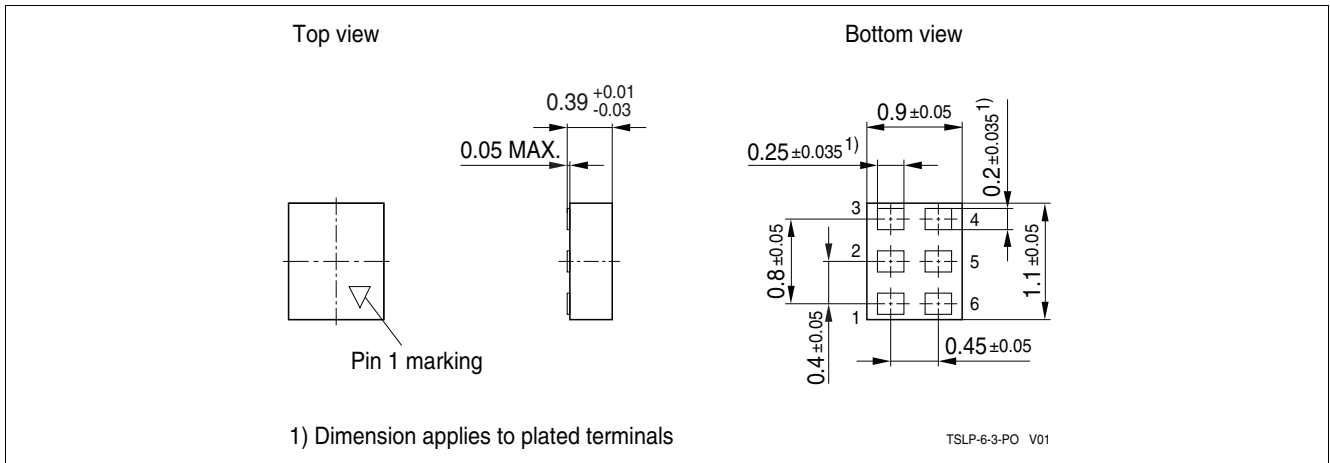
TSLP-6-3 Package Outline (top, side and bottom views)
